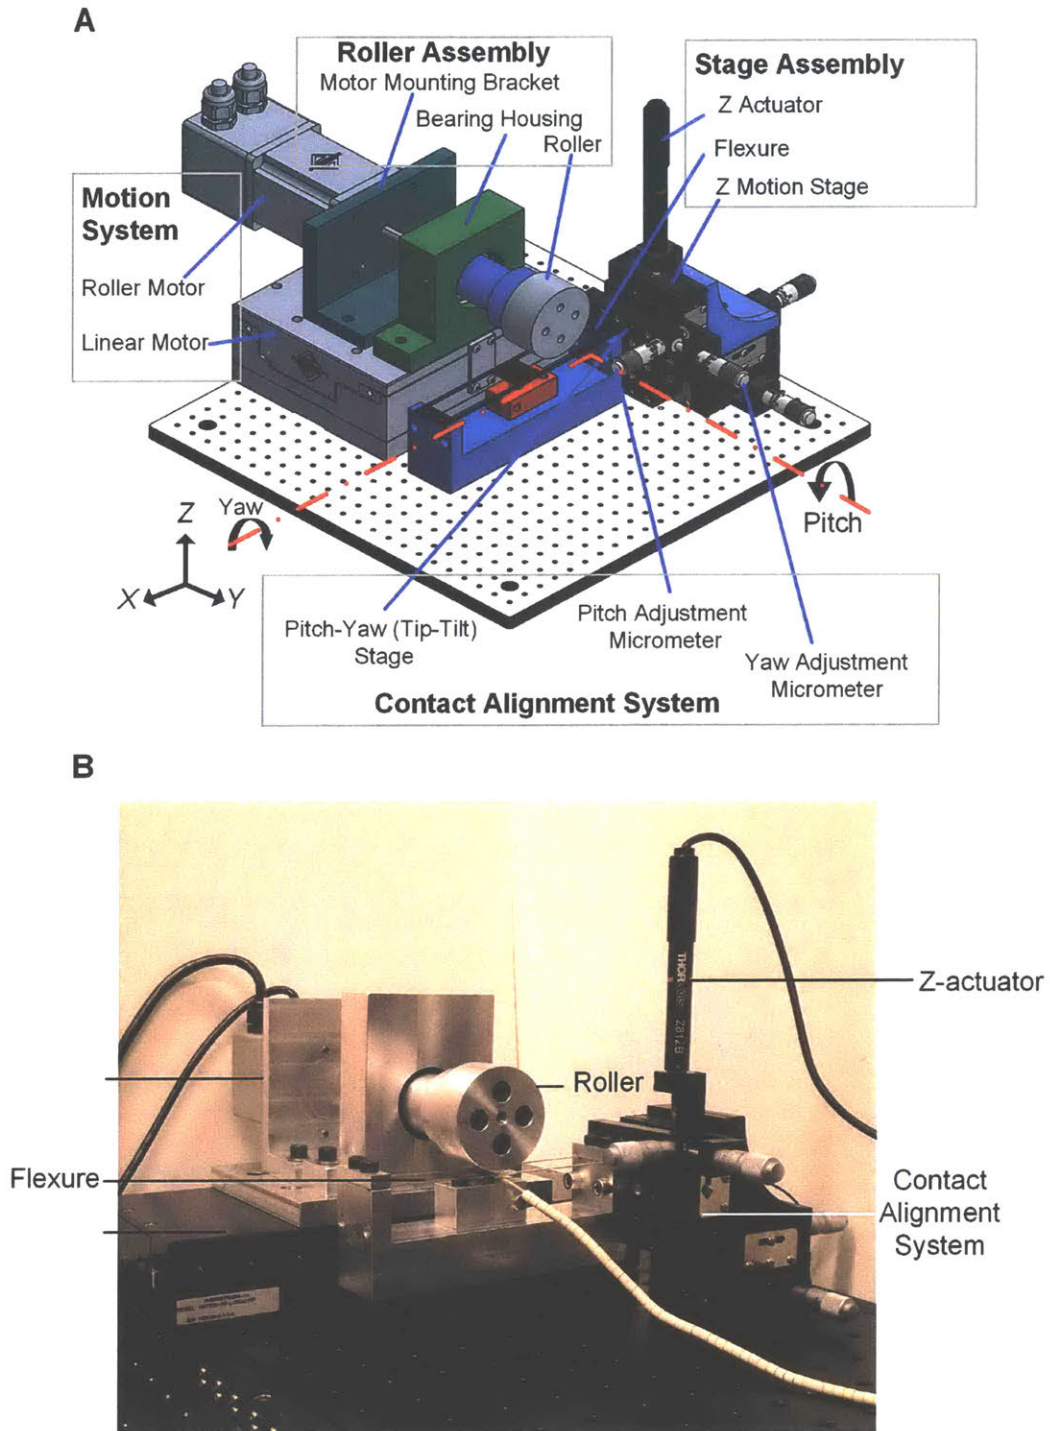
CAD model of the plate to roll machine A) Schematic and B) Photograph of the machine showing the four subsystems including roller assembly, stage assembly, motion and the contact alignment systems
